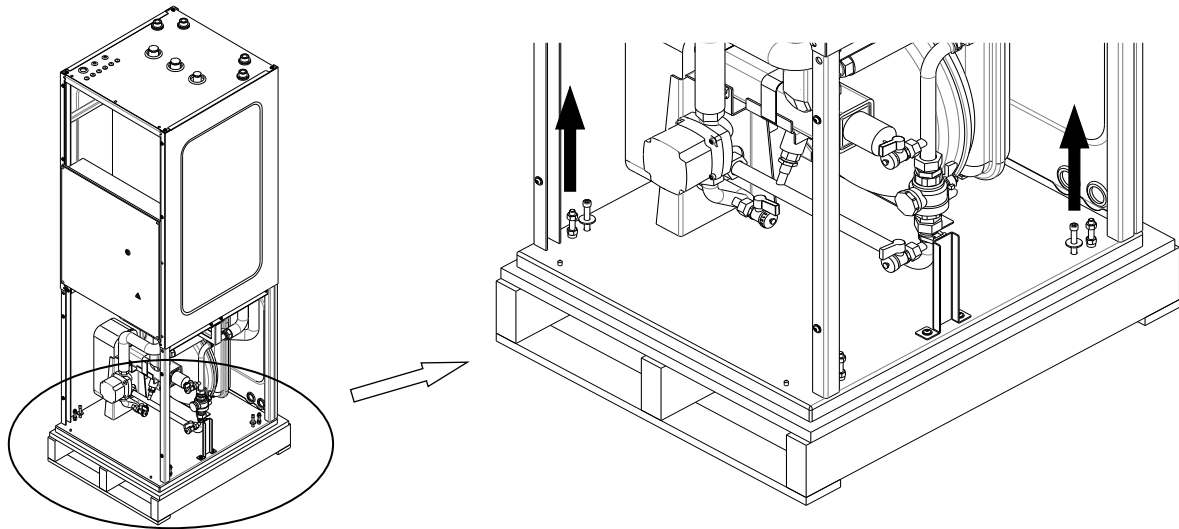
Disassembly of the screws that attach the Hidrokit Compact indoor unit to the pallet.
